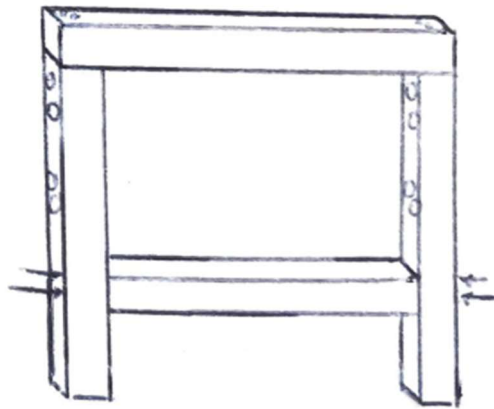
Drilling holes to connect second part of the frame subsystem.
